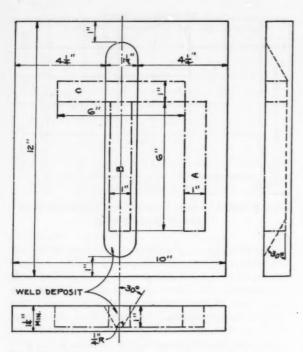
Sketch of casting used to evaluate various welding electrodes.
